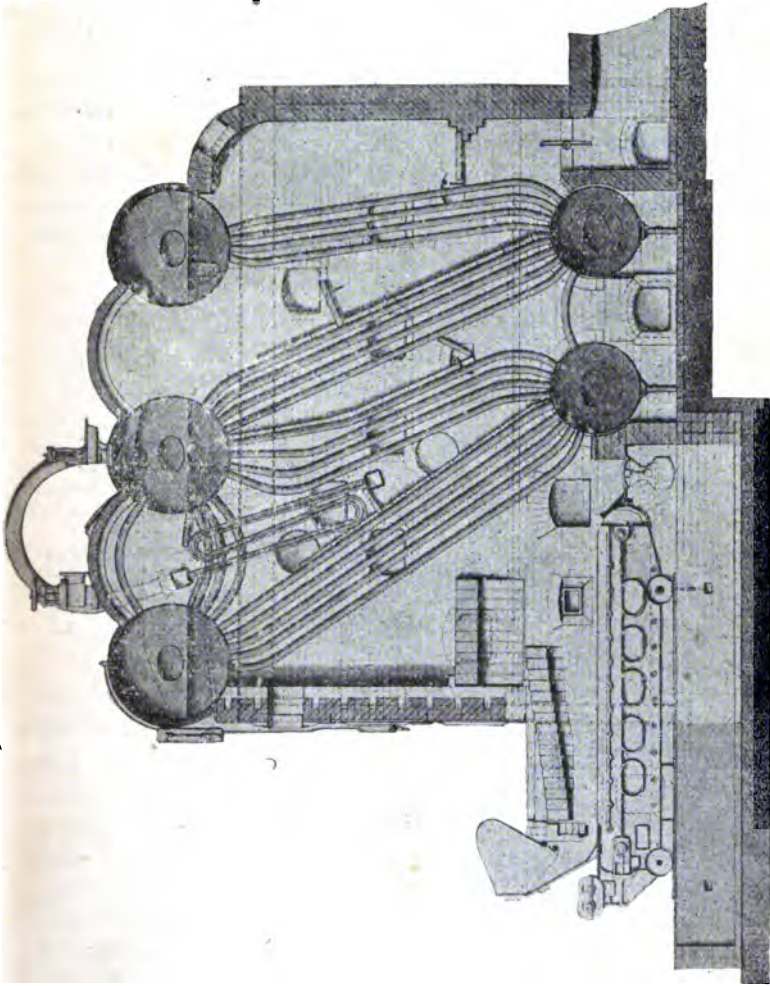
Sectional view of Stirling boiler with chain grate stoker.
